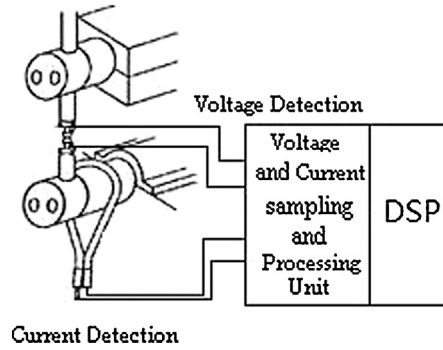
Electrode voltage and welding current measurement device.
